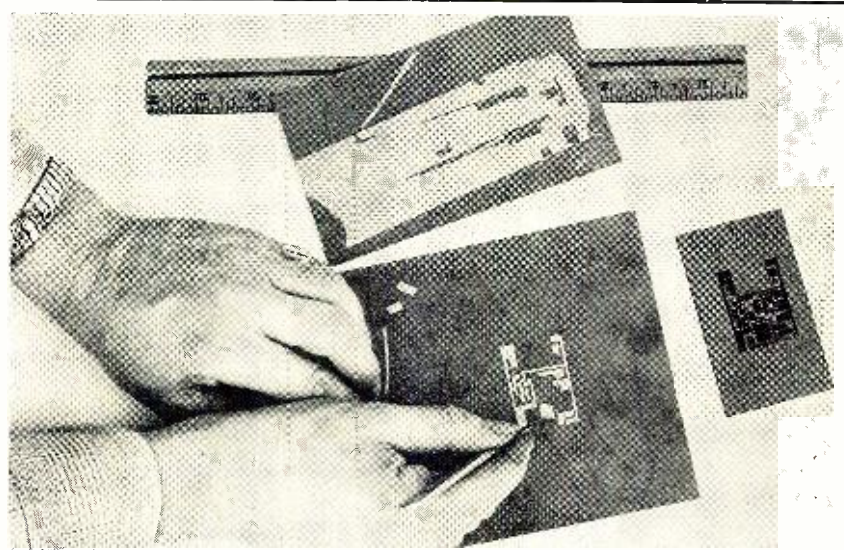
Preparing the printed circuit board. Technique can be followed at home.
